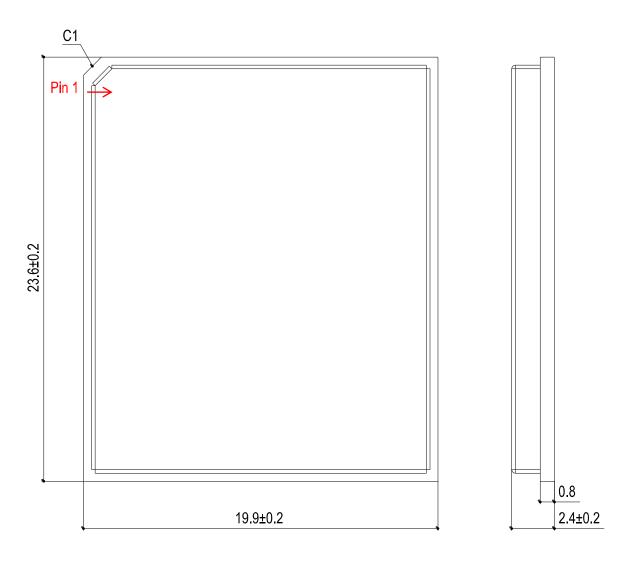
EG915Q-NA Top and Side Dimensions (Unit: mm)
